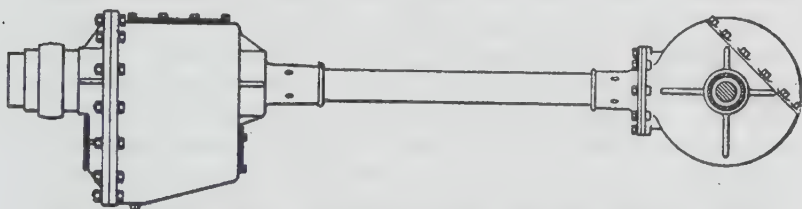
GEAR BOX ON FORWARD END OF TORQUE TUBE.
